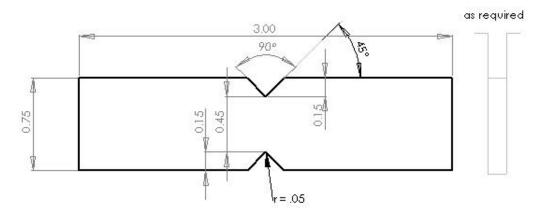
Shear Test Specimen Geometry (Courtesy of TRL)
